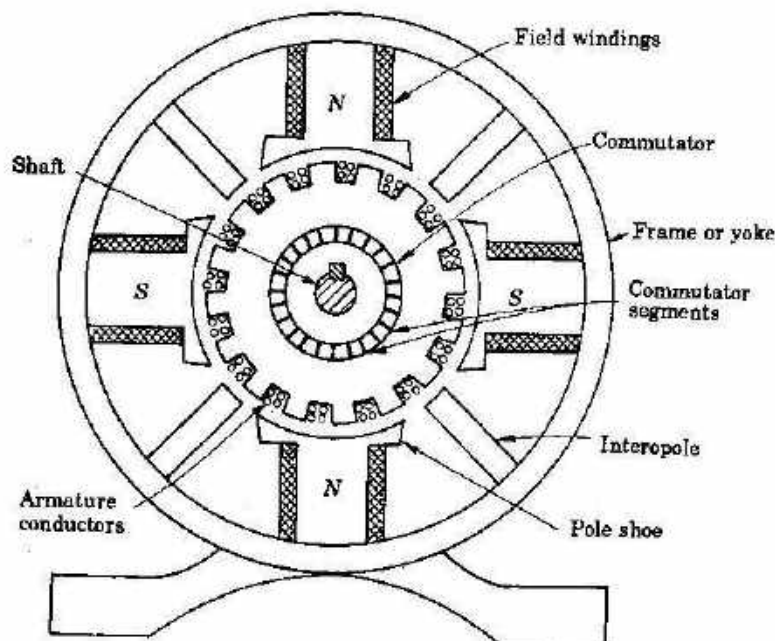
Main parts of a 4 Pole DC Machine
